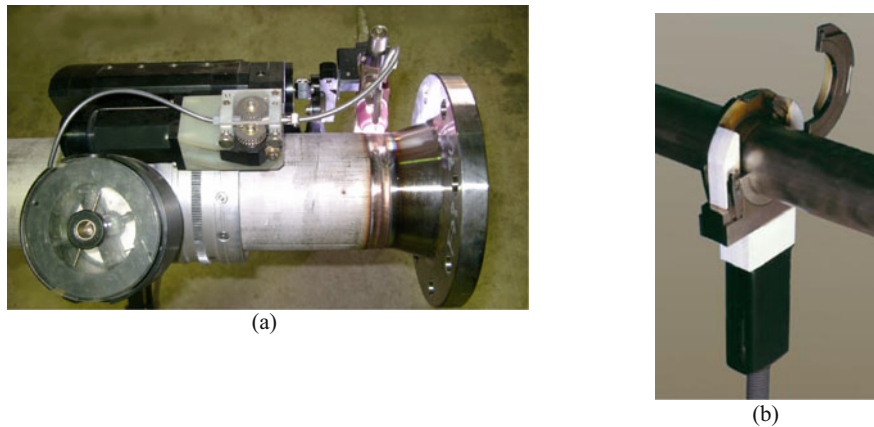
Orbital welding. (a) Typical orbital welding (for large diameter). (b) Typical orbital welding (for small bore)
